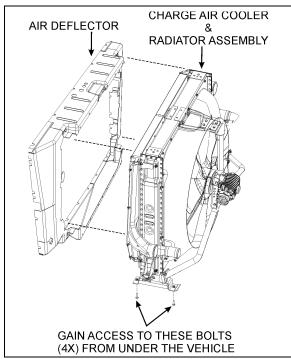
REMOVAL OF THE RADIATOR & THE CHARGE AIR COOLER
